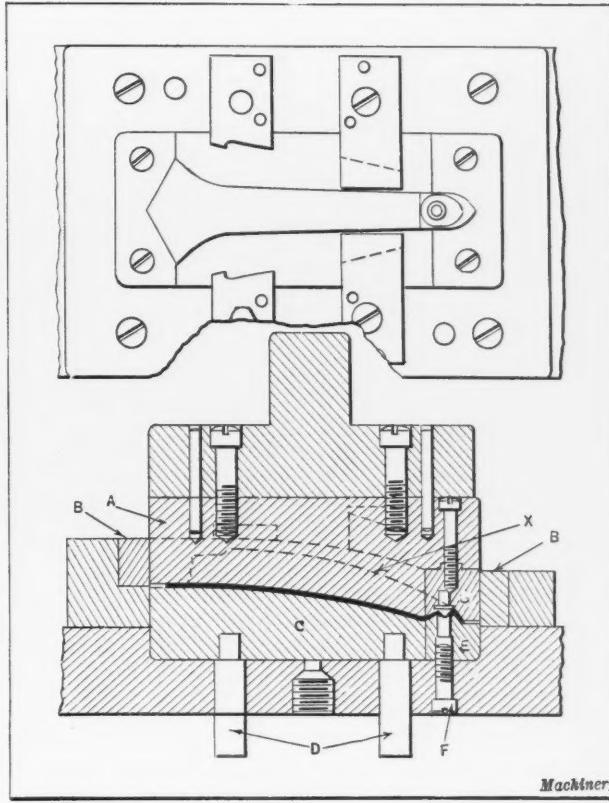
Die for forming the Arm into a Channel Section and for partly shaping One End
